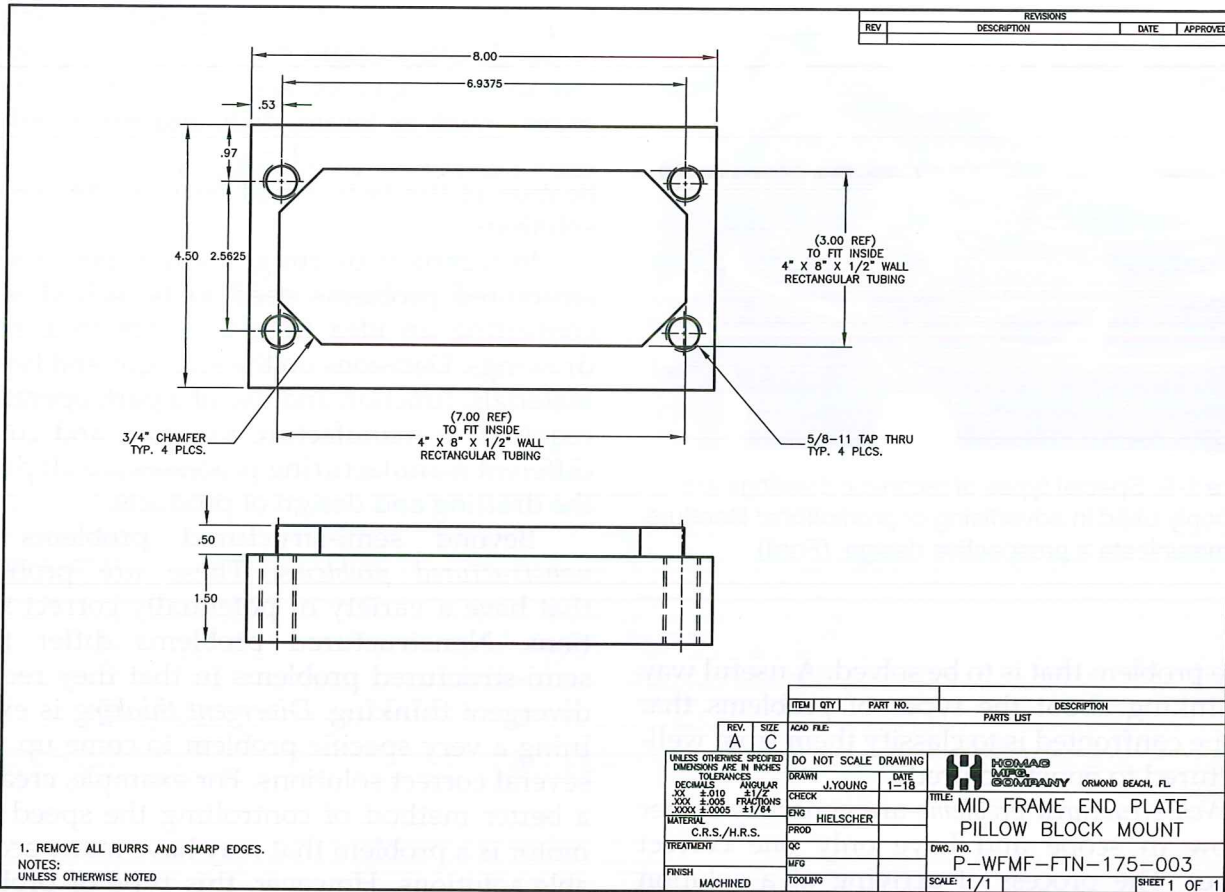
A set of drawings may contain many different types of drawings and views, such as this detail drawing for a welding fixture assembly. (Autodesk, Inc.)
